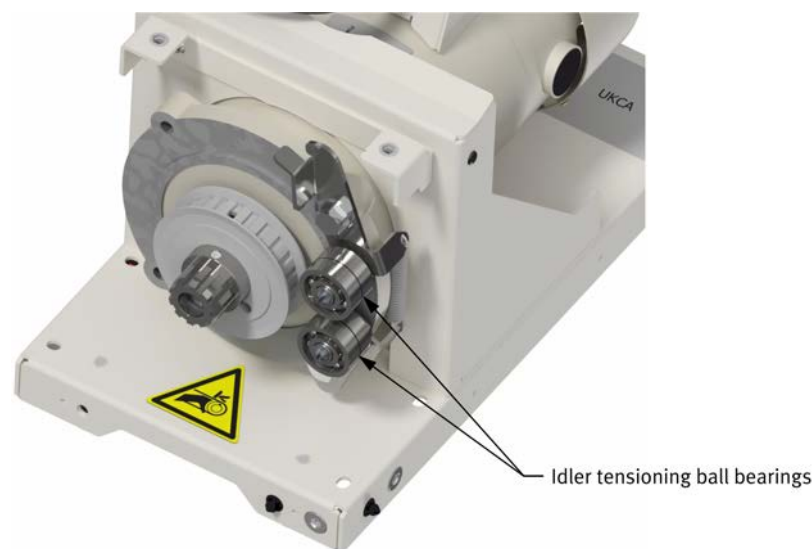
The idler tensioning ball bearings of rotating machines require periodical lubrication.
